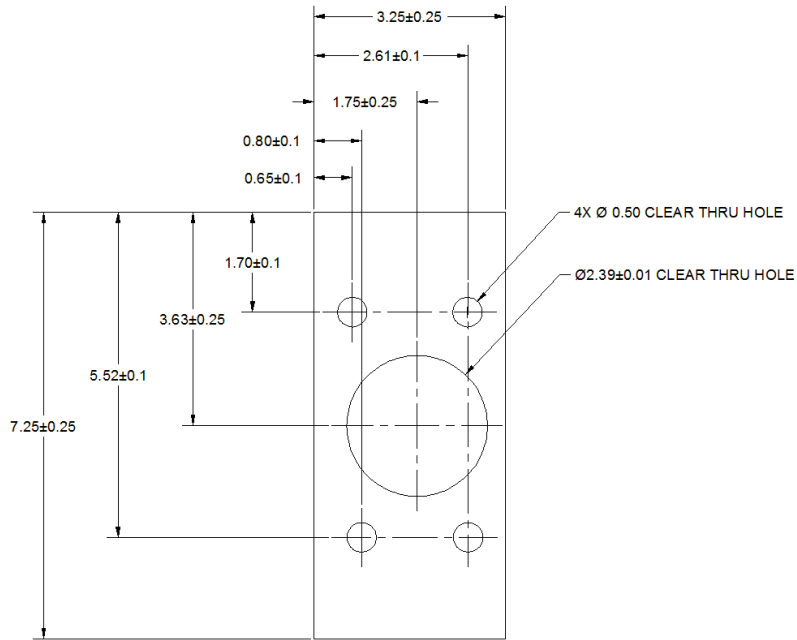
Air box to Compressor Adaptor Dimensions (in Inches)
